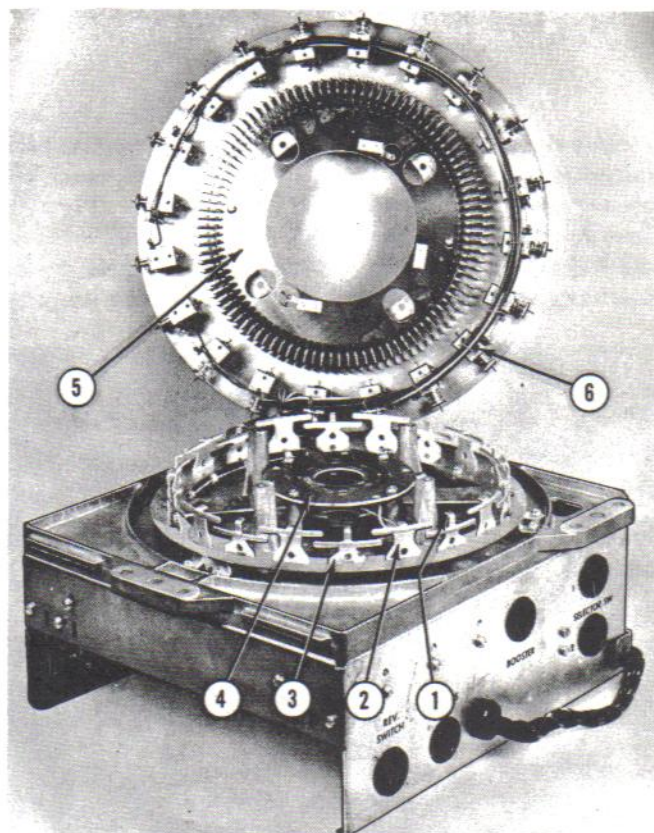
ELECTRIC SELECTOR ASSEMBLY - 2510
